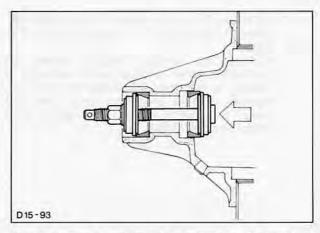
Remove outer drive pinion bearing cup with special tool no. 15–035 15–064
